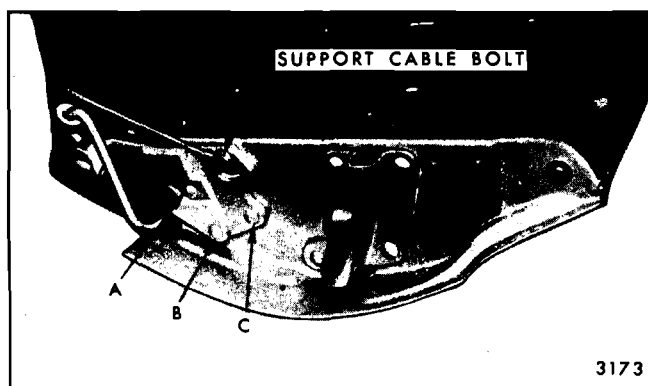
Tail Gate Left Hinge Assembly - "B" Body Shown - "A" Body Typical
